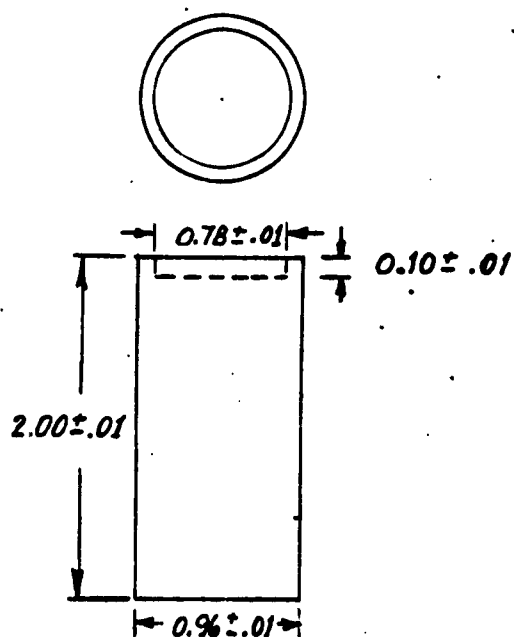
DRAWING OF STRIKER PIN HOLDER
